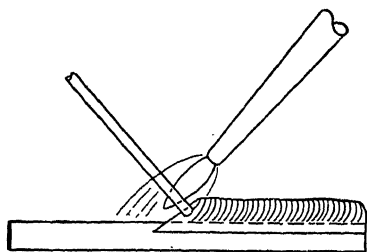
The welding rod rests in the center of the puddle. The torch is advanced slightly with each cross stroke.
